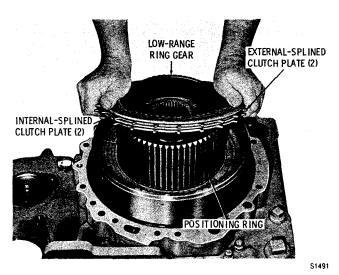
Installing high-range clutch plates (TRT-3 underdrive)
